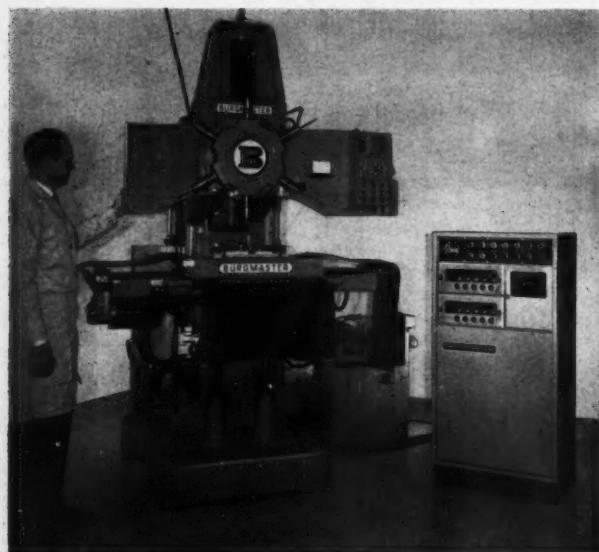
This Burgmaster drilling machine is equipped with Rheem punched-tape control for the co-ordinate positioning work-table and the turret
